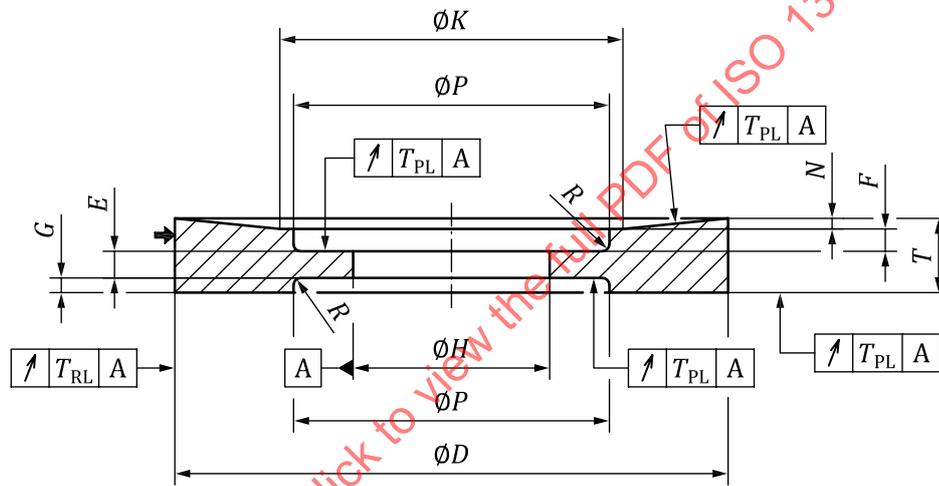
Grinding wheel, relieved and recessed on one side, recessed on the other side (Type 24)
